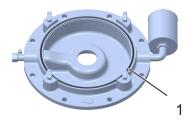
Inserting the O-ring (example: herborner.F-N/herborner.F-N-PM)
